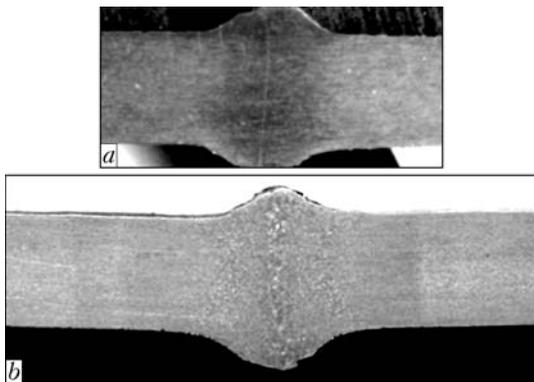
Macrosections of steel X70 welded joints made by MIAB welding (a) and FBW (b)
